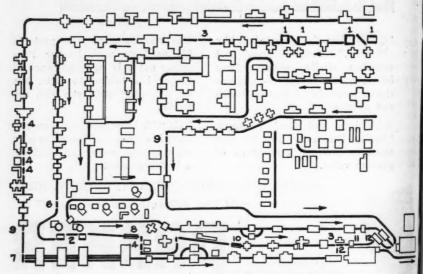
Layout of cylinder department at Lycoming Manufacturing Company's plant, showing conveyor lines.
